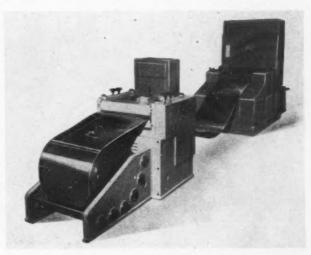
Zeulenroda Type PKZSM 1 x 500 Expanded Metal Forming Press
